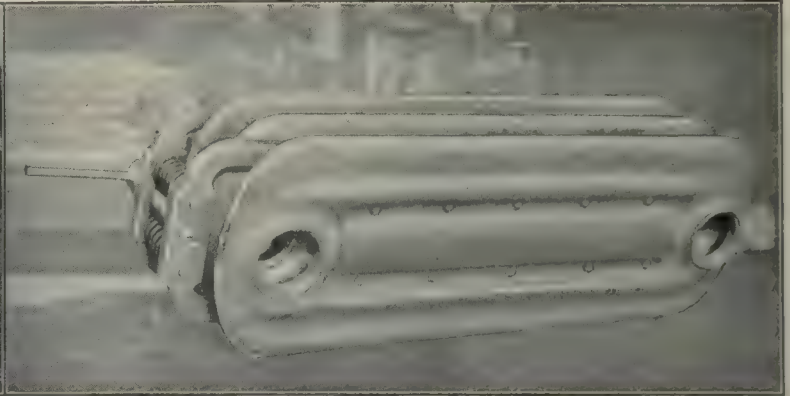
ASSEMBLE WELDING THE SECTIONS
